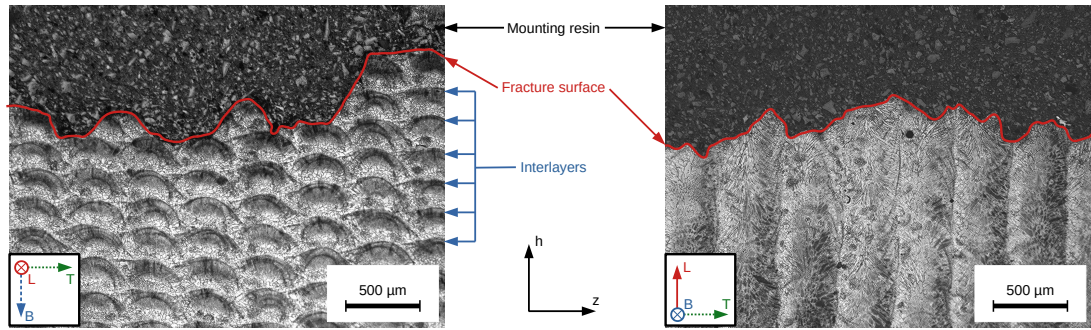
Macroscopic crack aspect of the crack surfaces obtained for each type of specimen. Left : // specimen. Right : ⊥ specimen.
